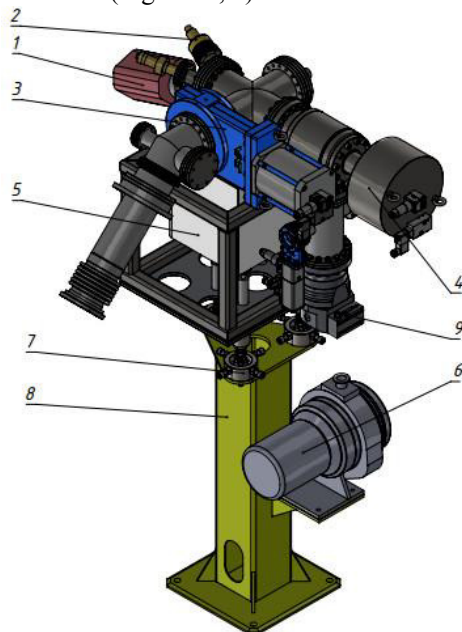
View of XHV station for cold parts. 1- mass-spectrometer, 2 – cold or hot cathode and Pirani vacuum gages, 3 – all-metal gate, 4 – all-metal valve, 5 – ion pump, 6 – scroll pump, 7 - adjustment jack, 8 – upright with frame, 9 – turbomolecular pump
